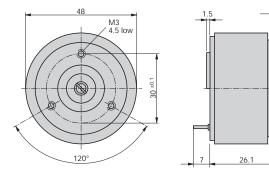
KINAX 2W2 with special drive shaft at front only, Ø 6 mm, length 12 mm.
